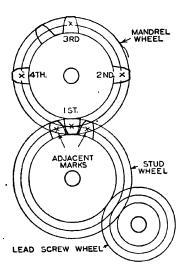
Marking gearwheels for CUTTING MULTIPLE THREADS
